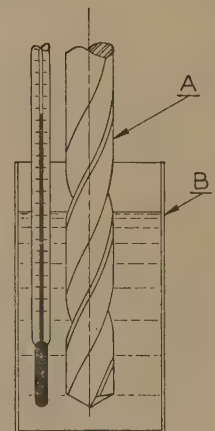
MEASURING HEAT IN TOOL AFTER CUT
